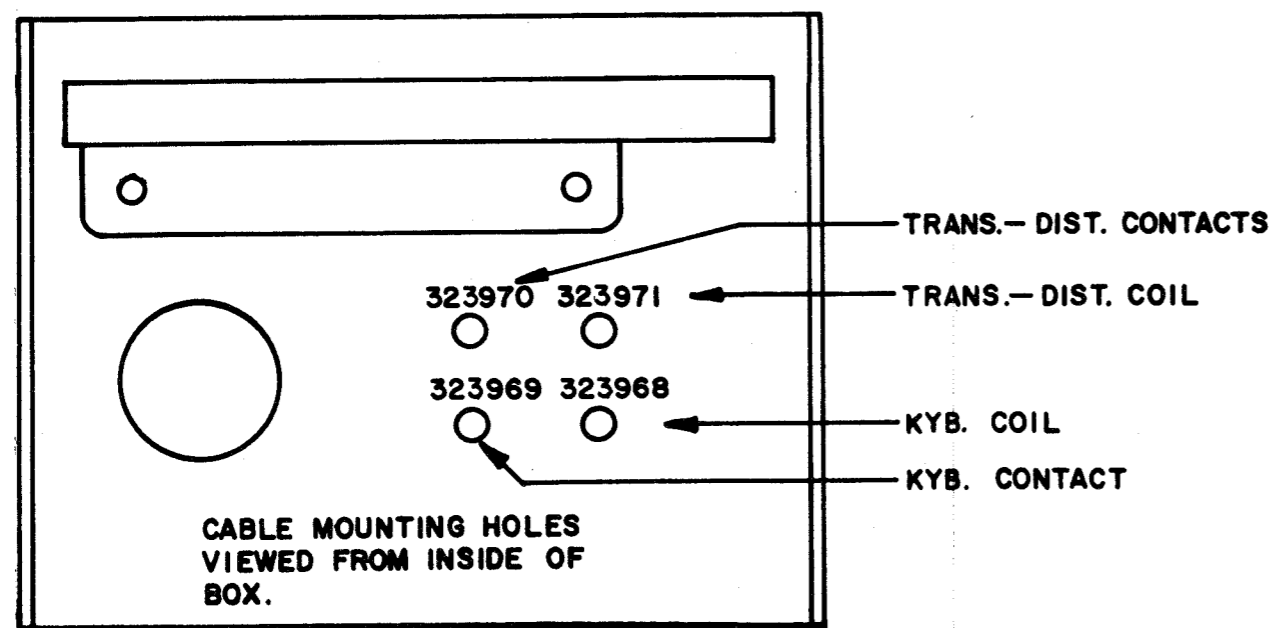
323812 Electrical Service Assembly (Clutch) Wiring Diagram (Sheet 1 of 4)
